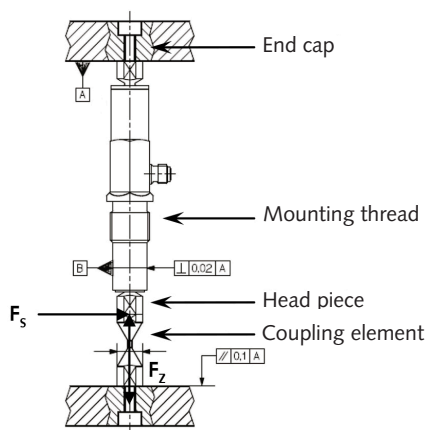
Mounting of Type 9205 between two plates with coupling element
